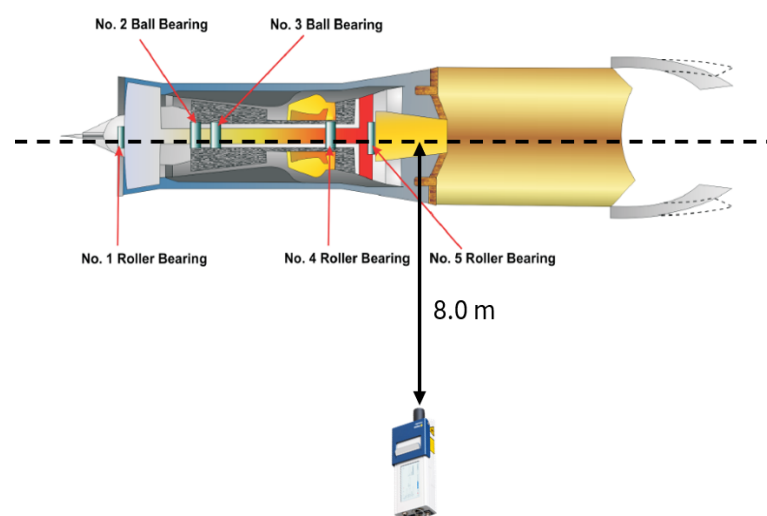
Layout of the individual supports of the P&W F100-PW-229 engine: fan inlet bearing, forward section and gearbox bearing, and turbine bearing and fan drive turbine bearing path of the shaft pivot in support bearings [32].
